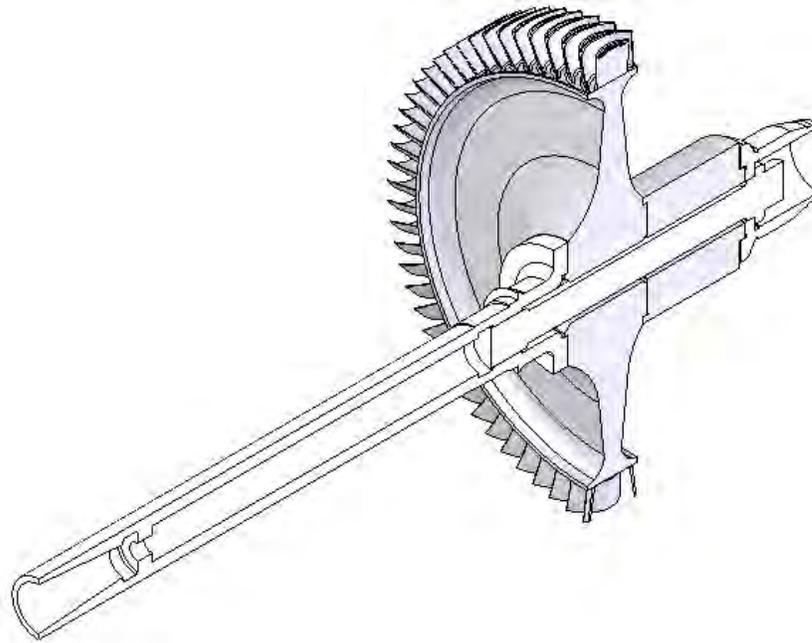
10:1 Turbo-Expander Rotor Assembly
